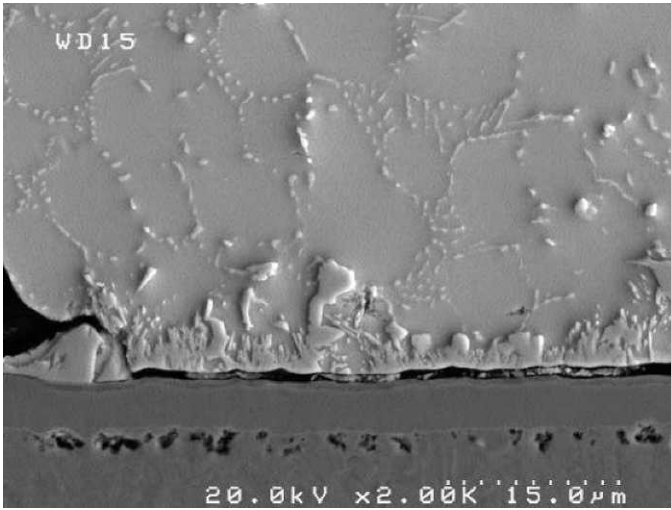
Board side failure of BGA with Paul solder on ENIG finish (170°C T_g board).
